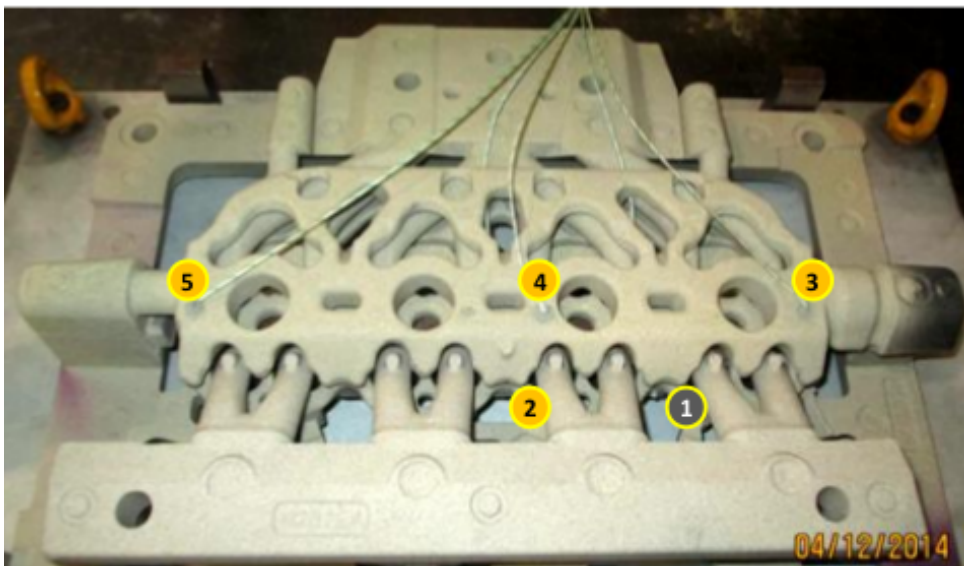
Water jacket sand core instrumented with thermocouples prior to casting.
